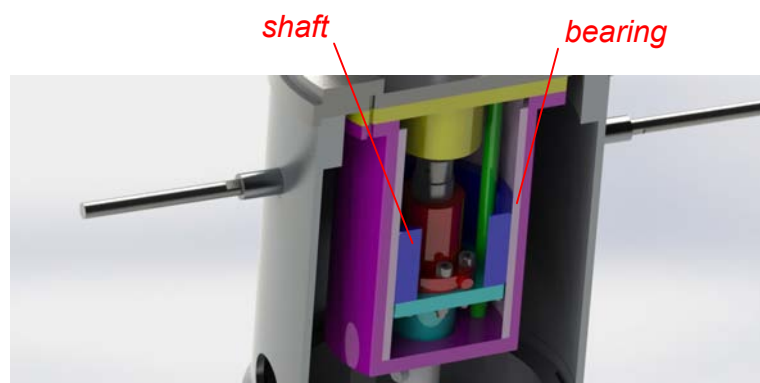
Detail of slide assembly - bearing (light pink) and shaft (blue)
